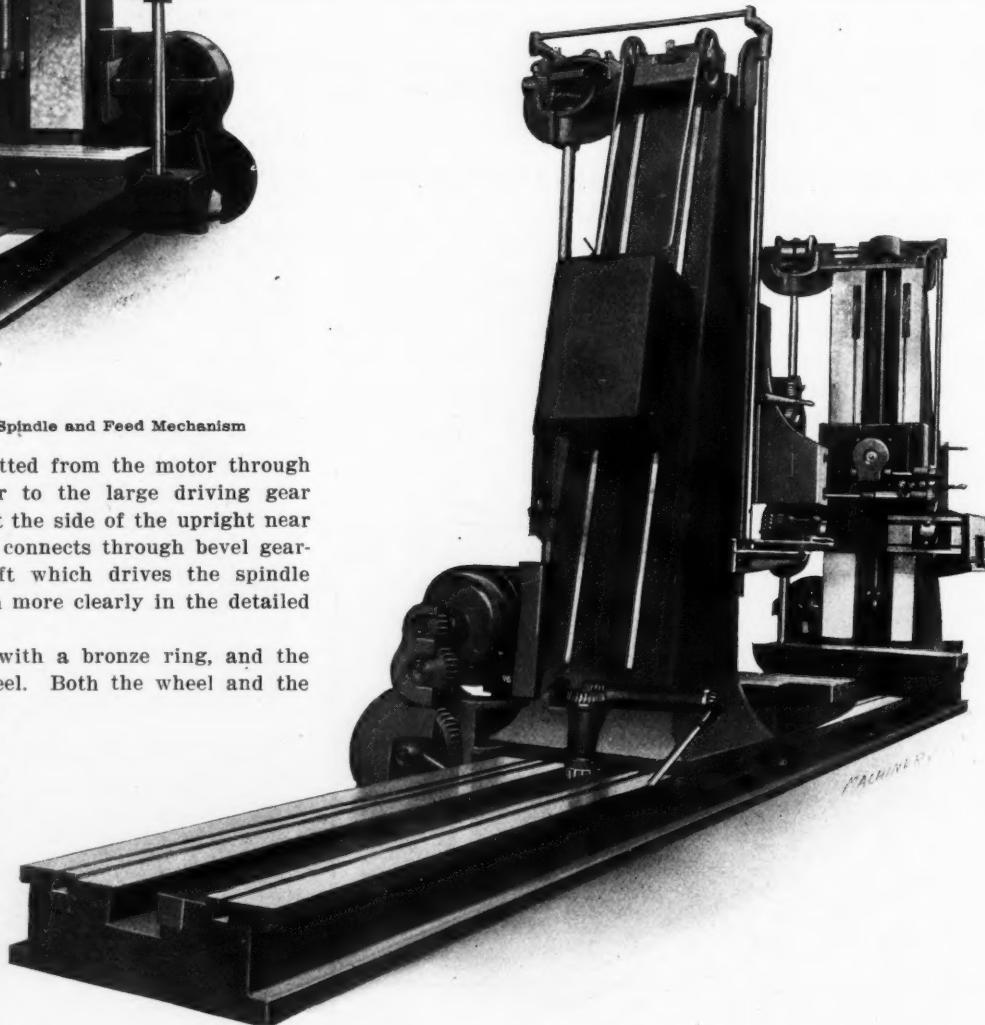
Large Vertical Milling Machine built by the Newton Machine Tool Works, Inc.
